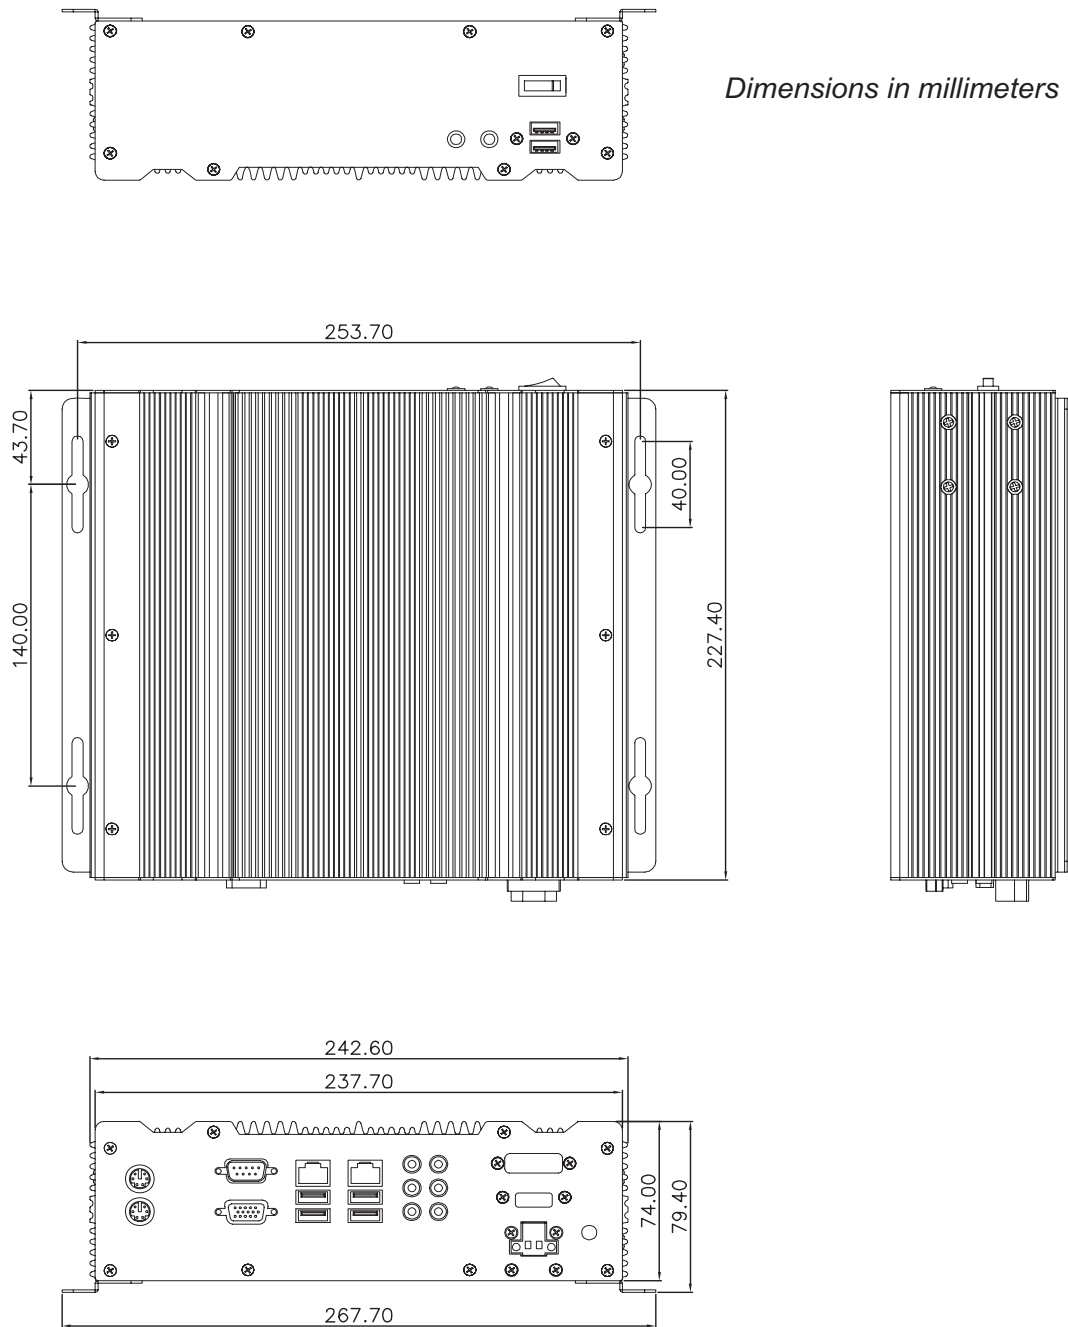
KUBE-8110 Mechanical Dimensions (with wall mount bracket)
